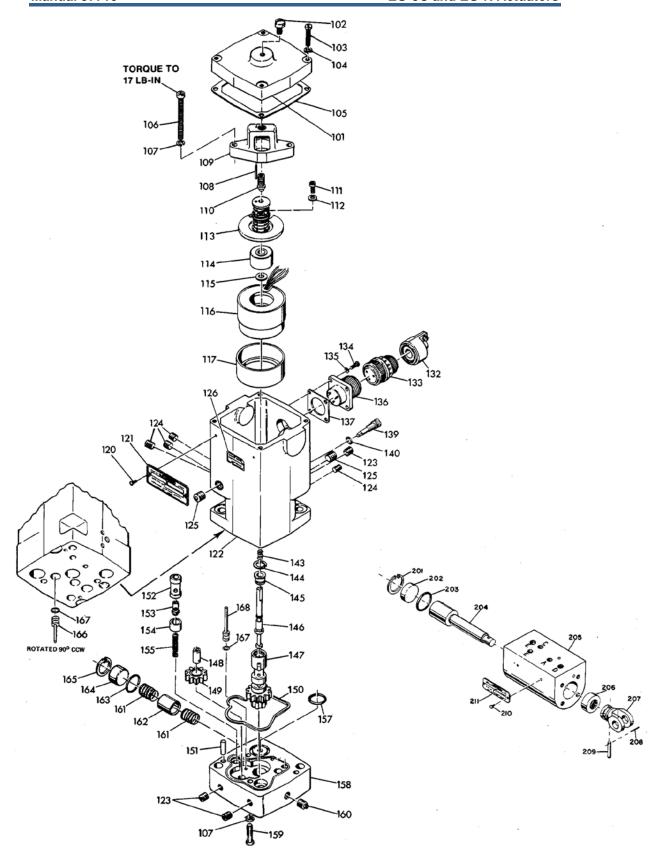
Exploded View, EG-R Hydraulic Actuator
